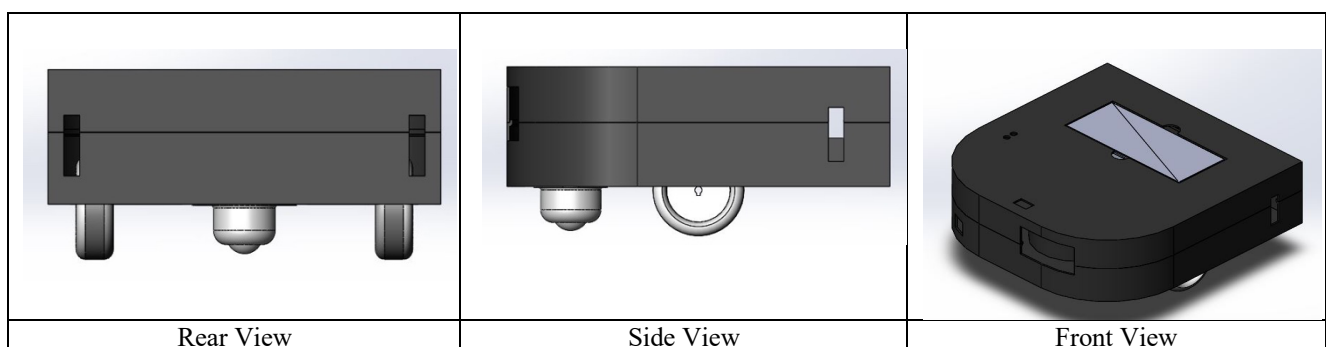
Mechanical Design of Robot Vacuum Cleaner
